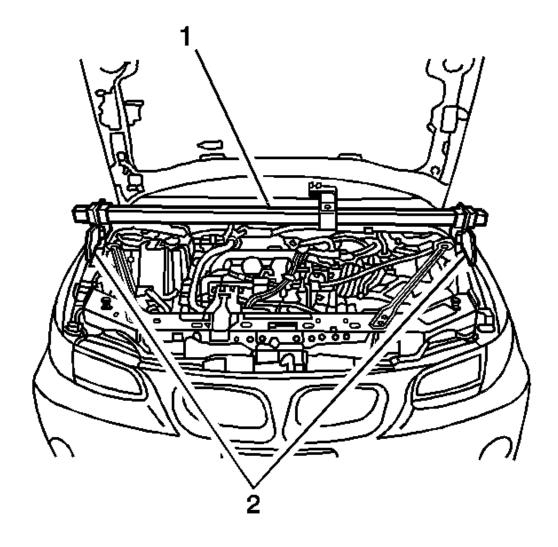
View Of J-28467-501 & J 28467-B Cross Bar Installed On Engine Courtesy of GENERAL MOTORS CORP.
